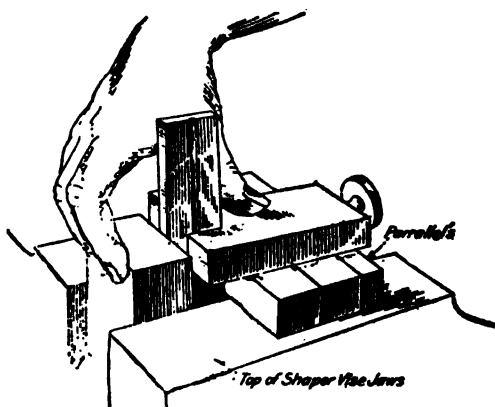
METHOD OF SETTING A PIECE SQUARE
